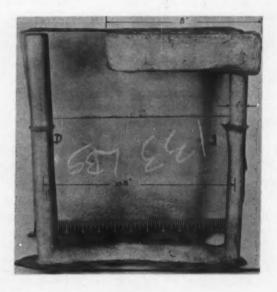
Components of preformed gating and risering system used for wedge casting.
